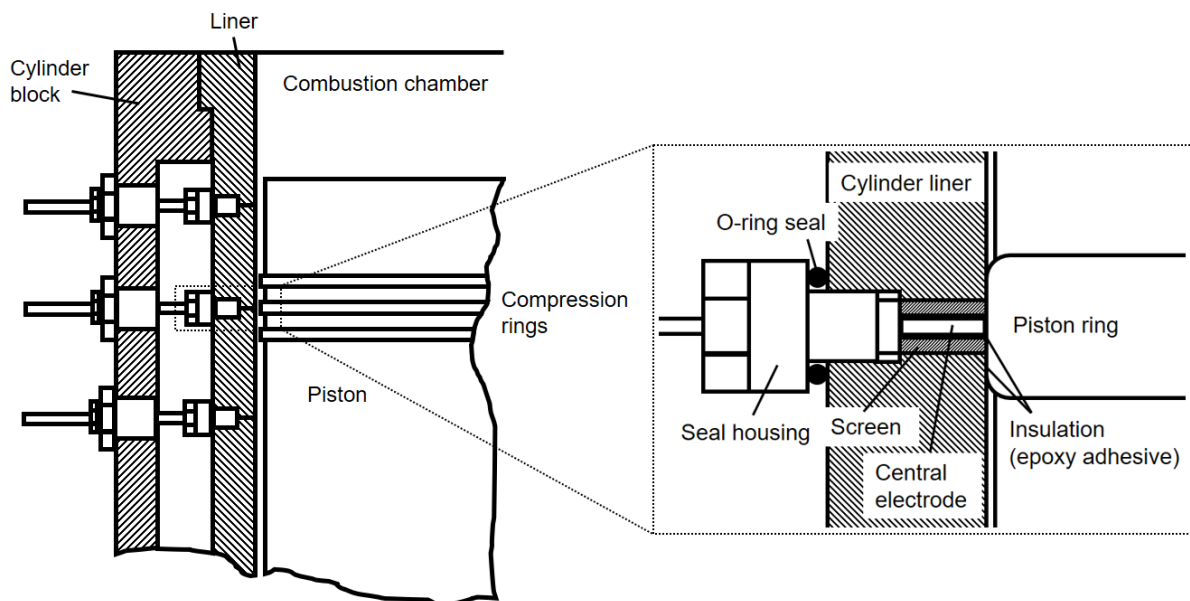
View of cylinder block of AV1L diesel engine showing assembly and position of capacitance gauges, based on Hamilton et al. [53].
